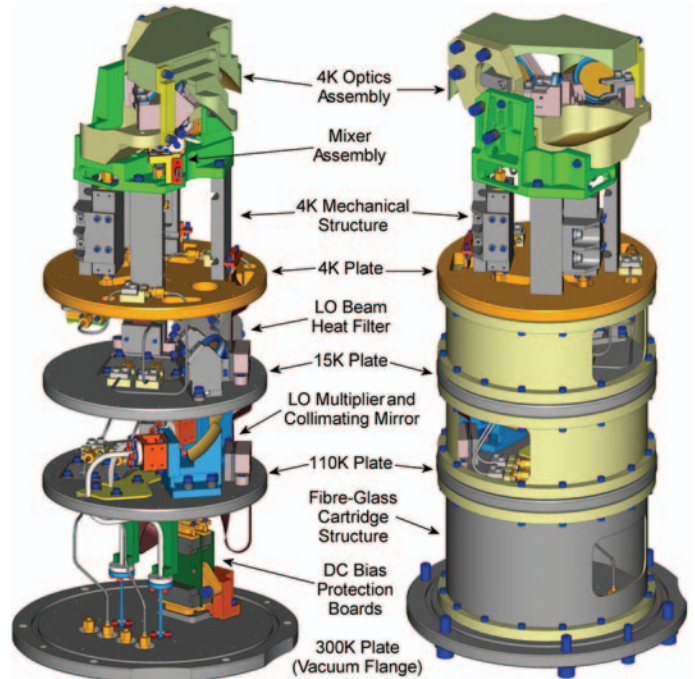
3-D drawing of the mechanical design of the Band 9 cartridge.
